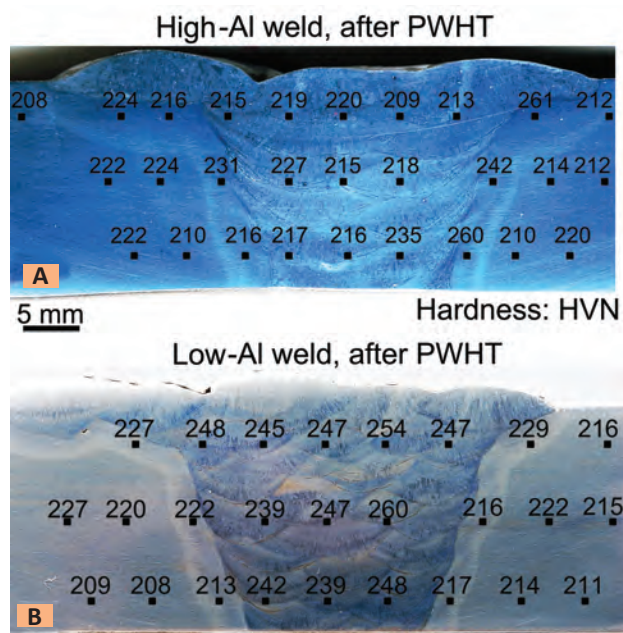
Hardness measurements after postweld heat treatment showing lower hardness in the high-Al weld than in the low-Al weld. A — High-Al weld with an average hardness of 219 HV in fusion zone; B — low-Al weld with an average hardness of 247 HV in fusion zone.
